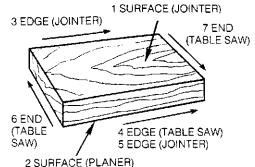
The seven steps and machines used to square up the six surfaces of a piece of stock.
